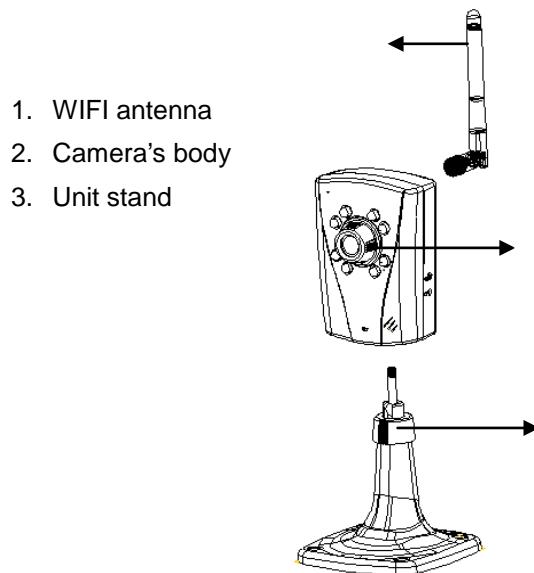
ACCESSORY ASSEMBLY EXPLODED VIEW
